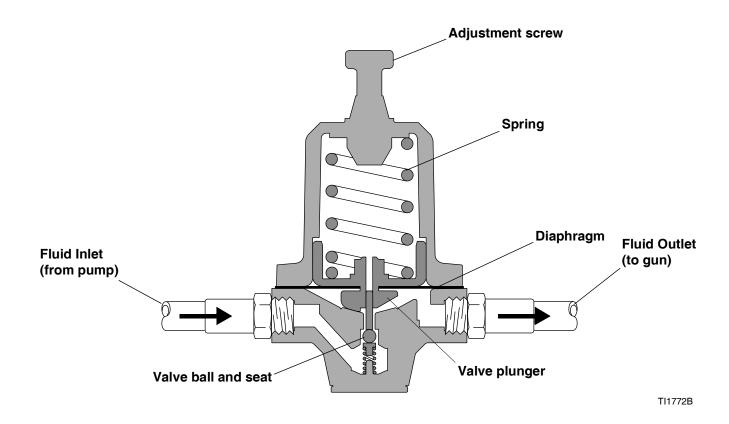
Cutaway of Mechanical Fluid Pressure Regulator
